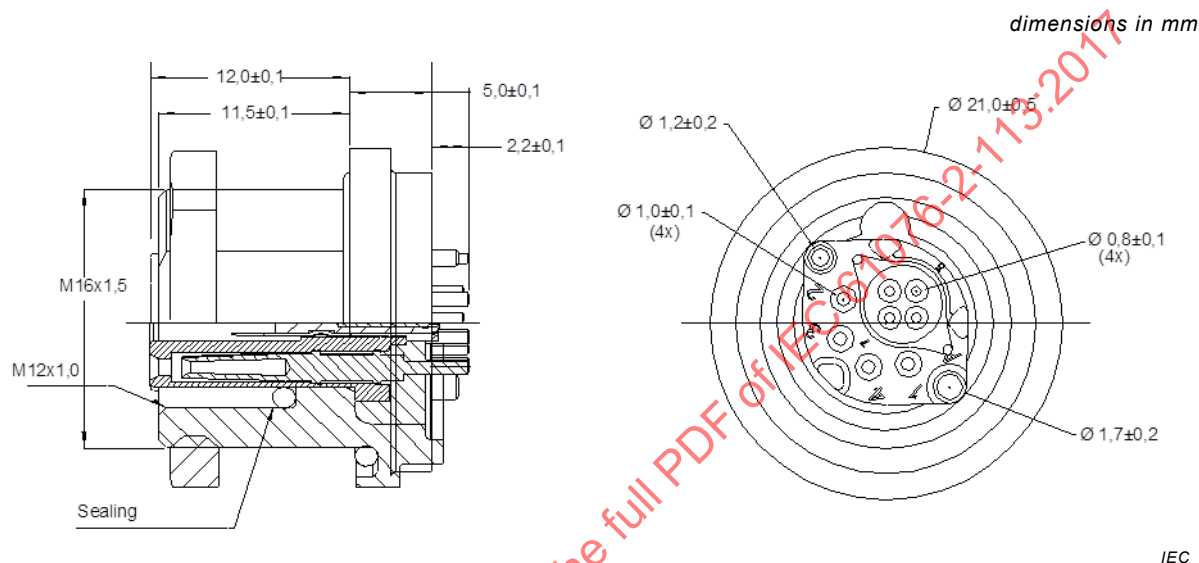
Fixed connector, with female contacts, with contact pcb tails, female coupling
